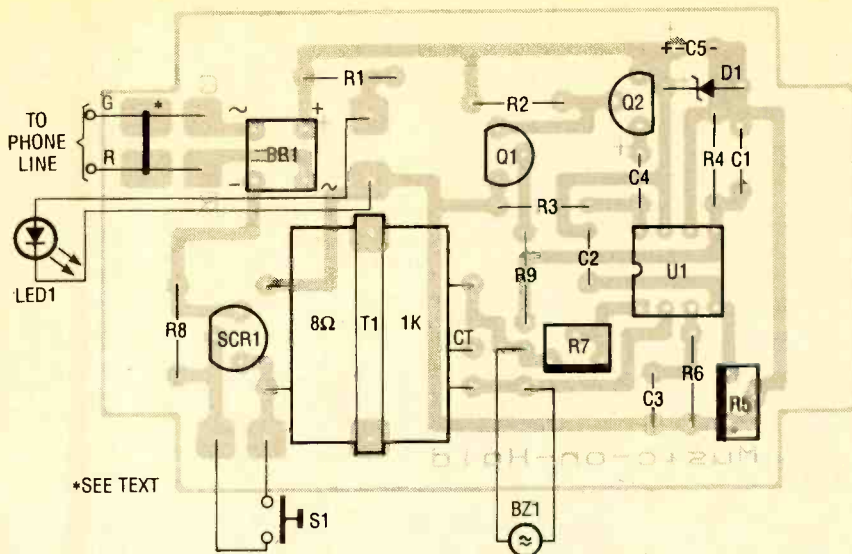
After you've etched and drilled your board, and obtained the parts listed in the Parts List, assemble the circuit using this diagram as a guide.
